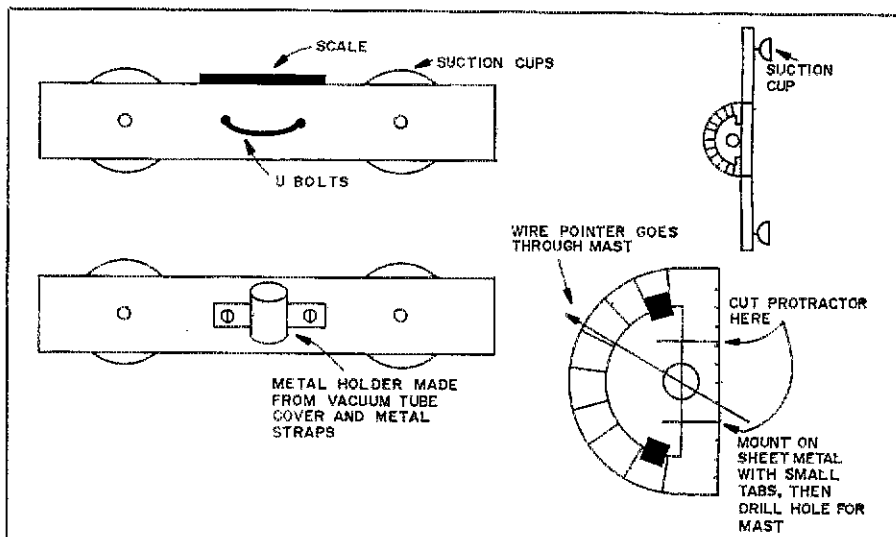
An inexpensive protractor makes a fine bearing indicator. The suction-cup mounts permit mounting on a vehicle.
